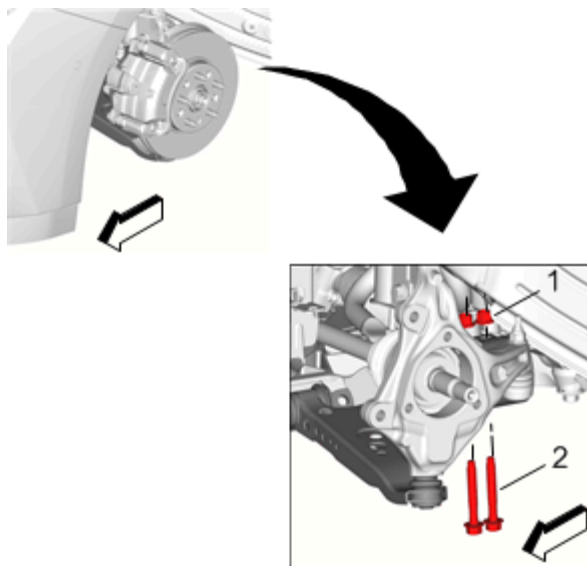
Front Lower Control Arm Rear Nuts And Bolts
